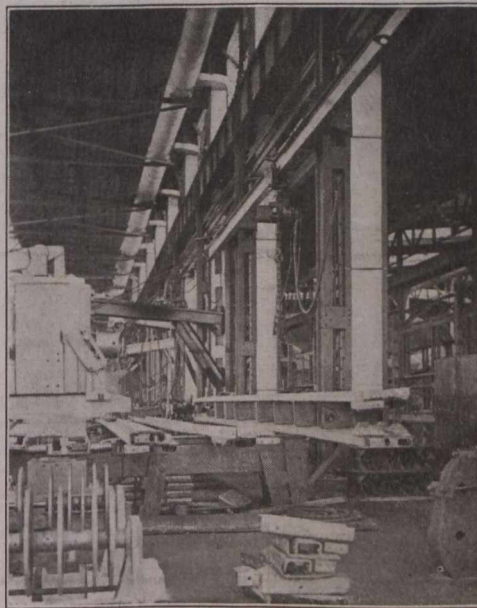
Assembling Centre Sills for Steel Box Cars.
